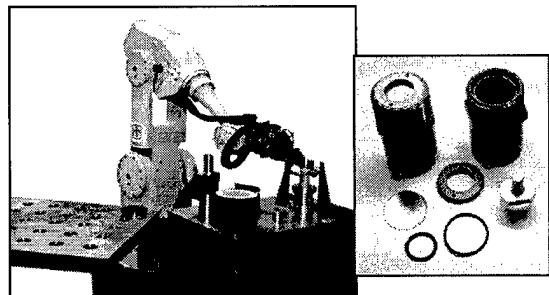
An automated explosive gas generator disassembly robot with the component parts of the MC1362 shown on the right.
